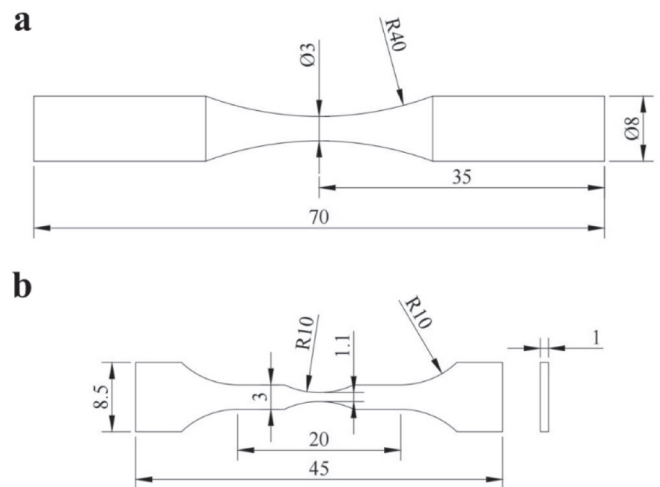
Geometry of fatigue specimens (in mm). (a) The cylinder specimen used on MTS servo-hydraulic testing machine. (b) The plate specimen used on SEM in-situ fatigue test machine.
